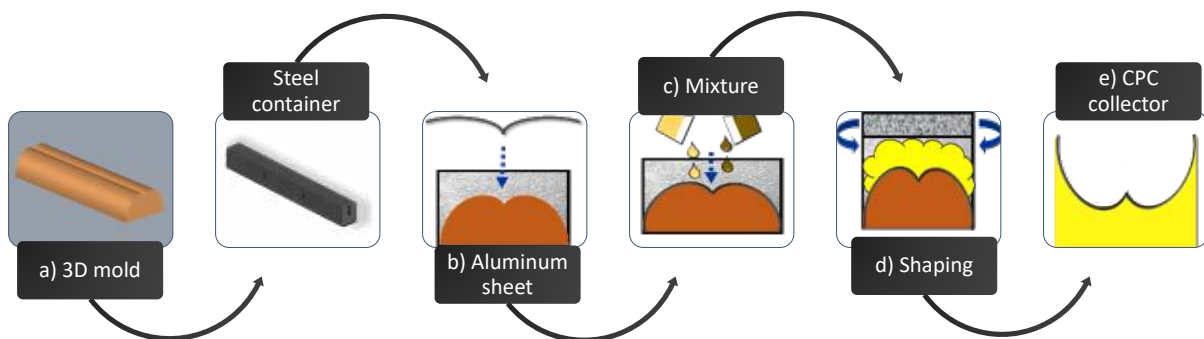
3D-Mold and aluminum sheet inside the container developed.
